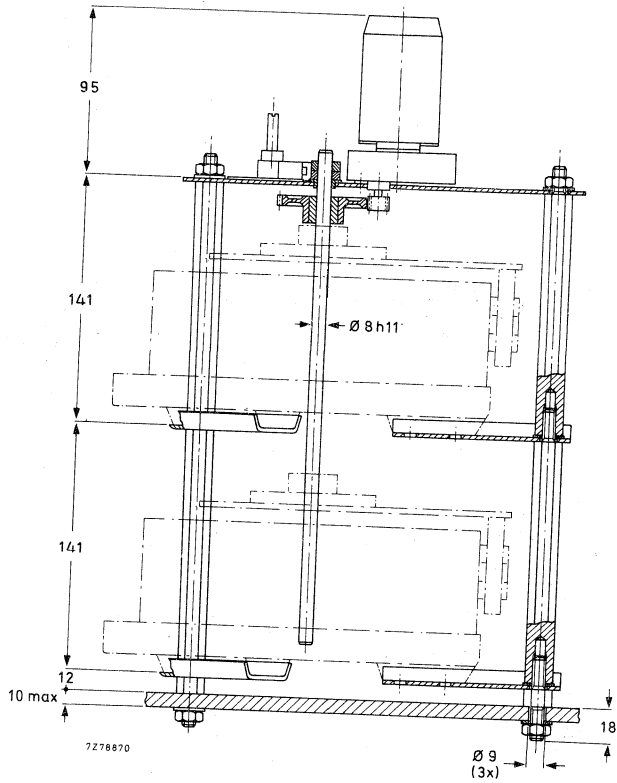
Motor drive for two ganged transformers. For connection of top-plate parts, see Fig. 24.
